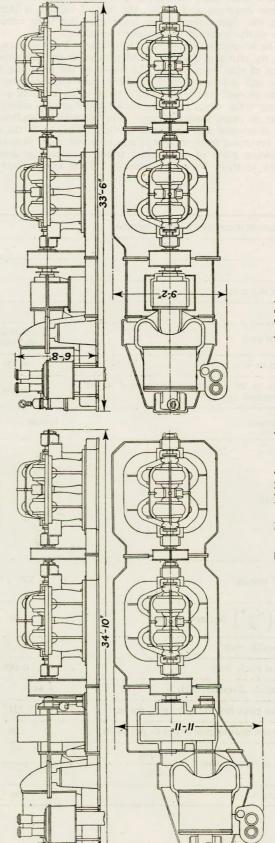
,360 h.p. turbo-pump; gear ratio 5:5:1
